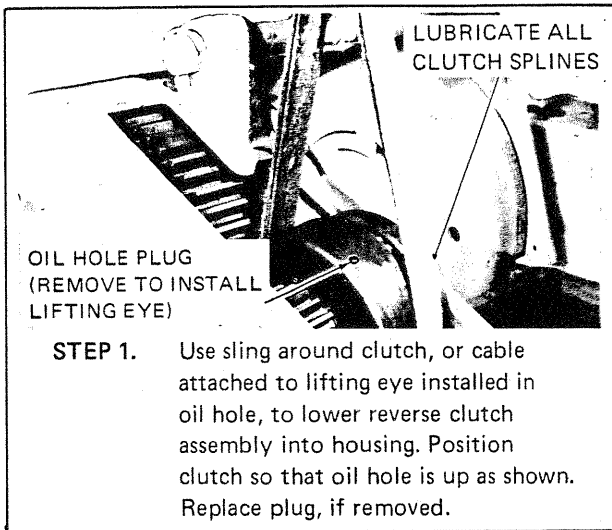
REASSEMBLY AND INSTALLATION OF BEVEL GEAR SHAFT ASSEMBLY (Sheet 1 of 4)
